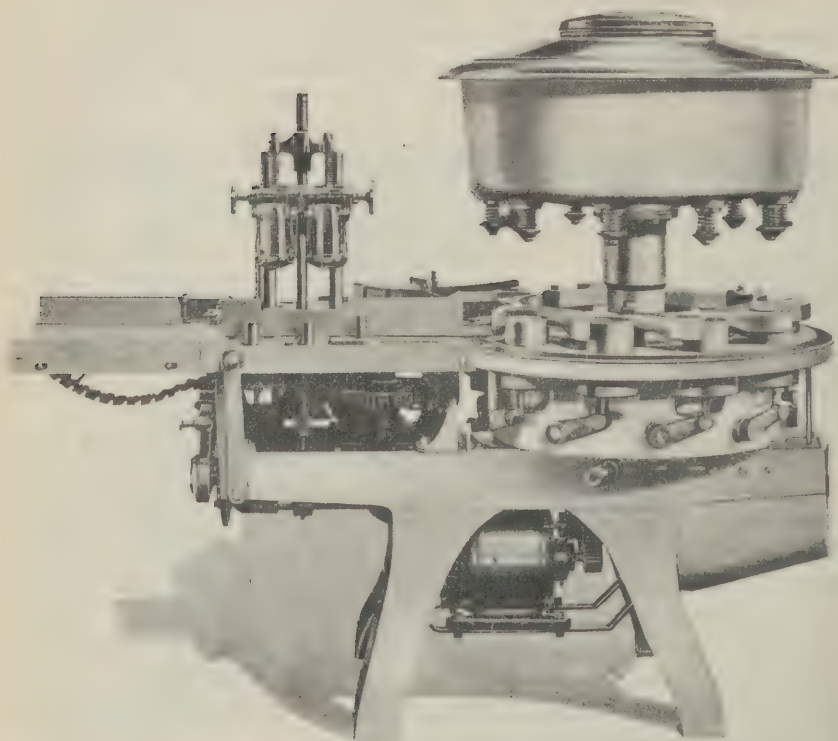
Automatic bottle filling and capping machine. (Courtesy of the Chester Dairy Supply Co., Chester, Pa.).
